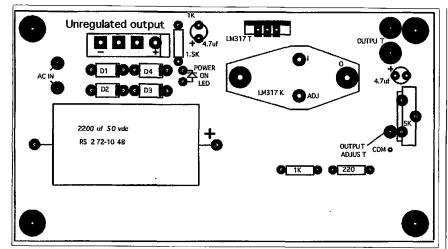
PC board component layout. Bridge rectifier is RS 276-1146. D1-D4 = 3 A 50 PIV 1N5400, RS 276-1141. PC-mount trimmers are 5k, RS 271-217. D5, D6 = 1N914s.
